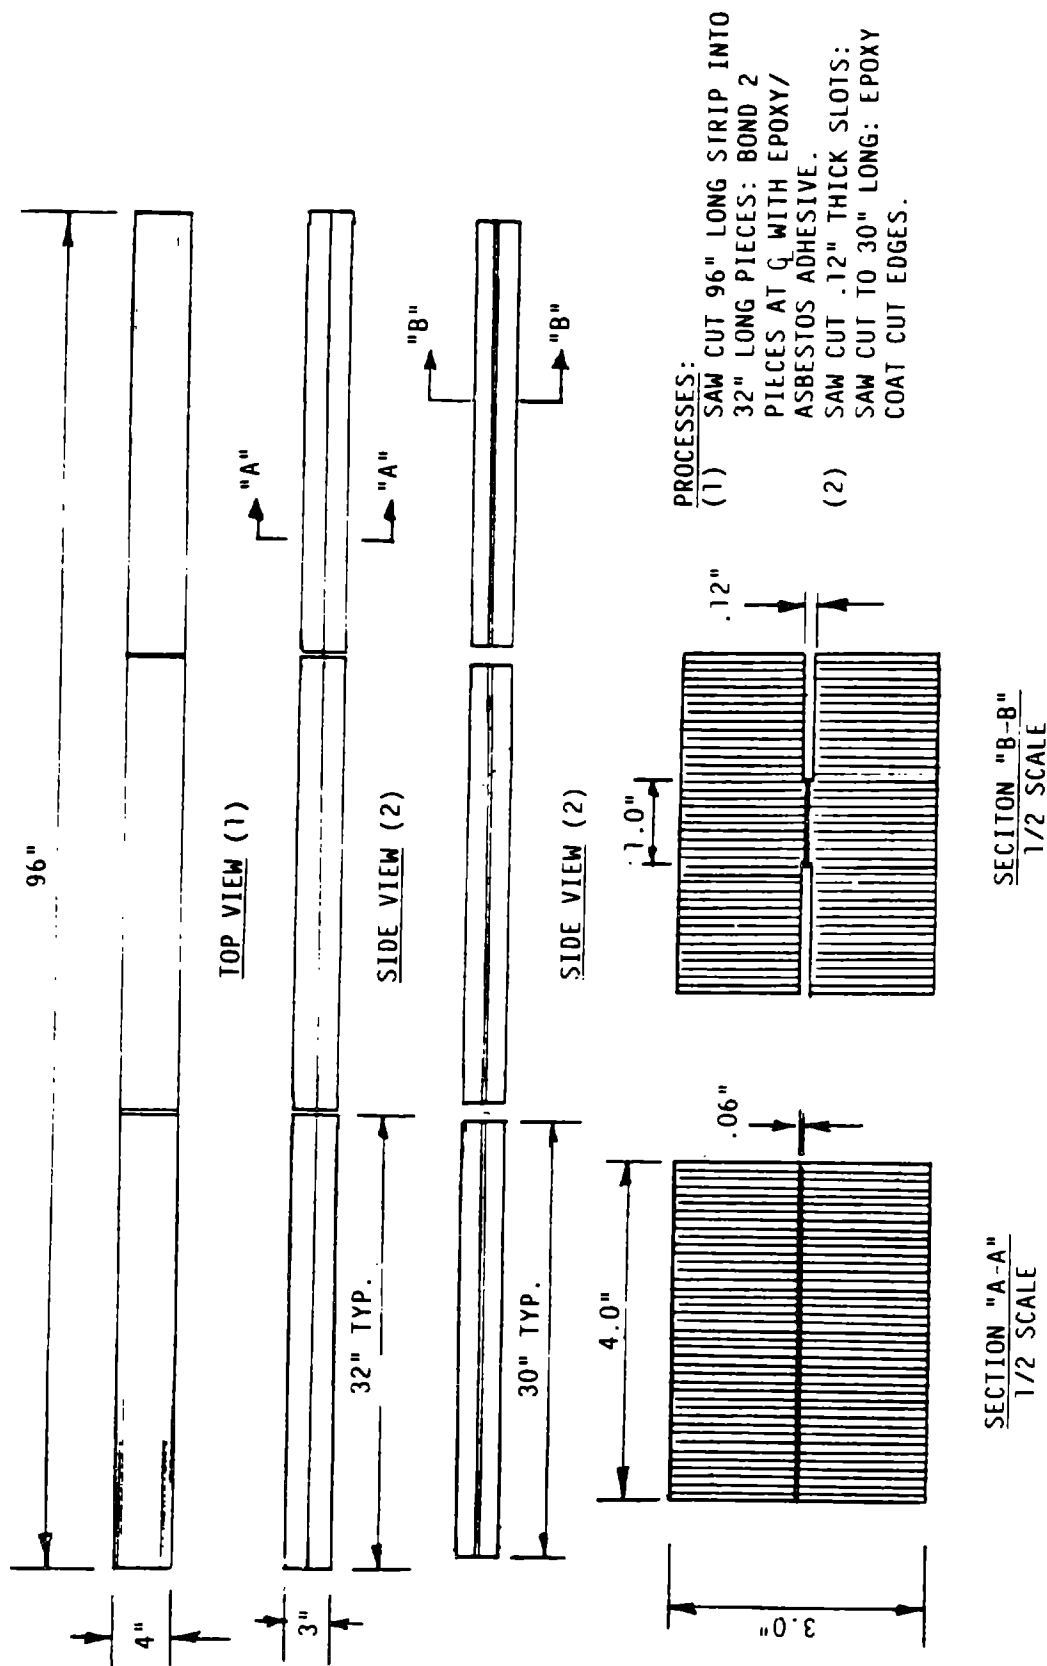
Fabrication of Longitudinal Butt Joint Test Specimens
